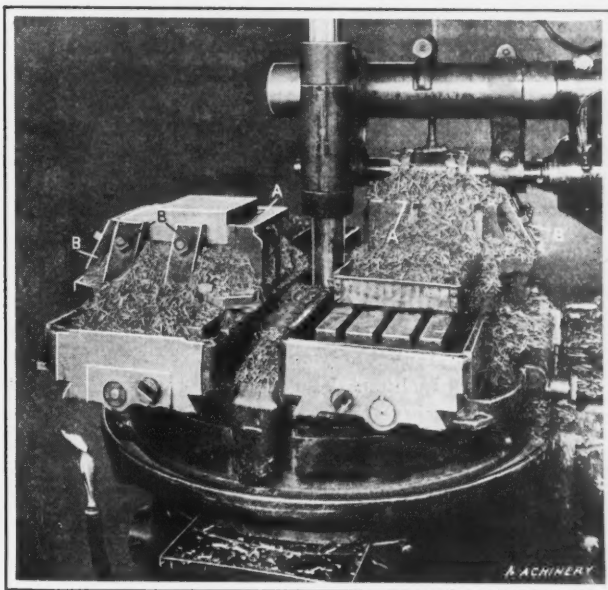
Indexing Rotary Milling Machine on which the Second Operation is performed on the Turret Revolving Pawl Block
